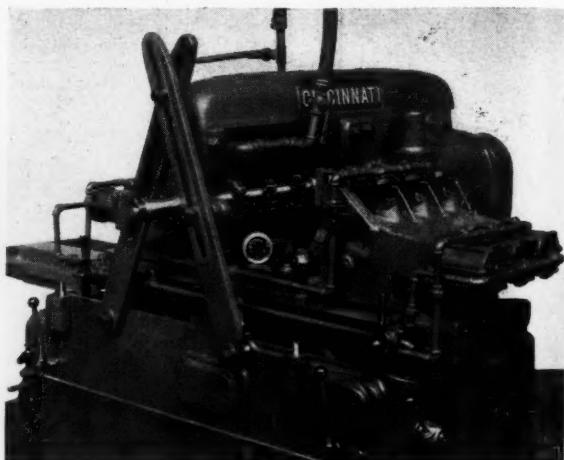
An excellent example of a high production milling fixture, arranged for air clamping.
